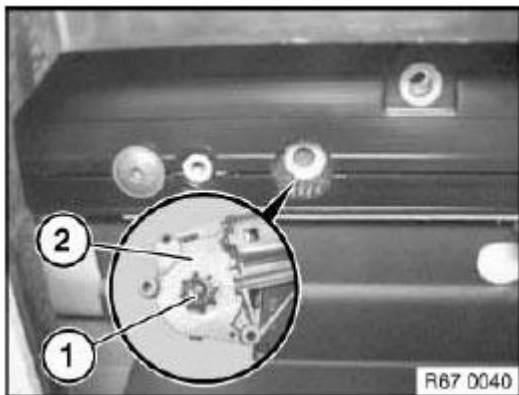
Identifying Gear Wheel And Slide/Tilt Sunroof
